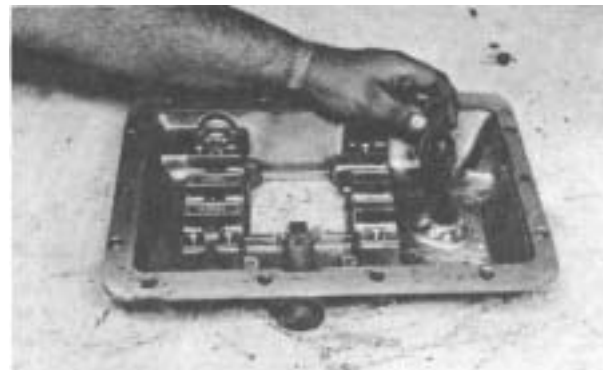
Install 1st & reverse shift lug, rocker lug, shift rail and spacers in rail groove over mesh lock ball and spring. NOTE: Position widest spacer between shift lug and front support. The narrower spacer between the shift lug and center support.
